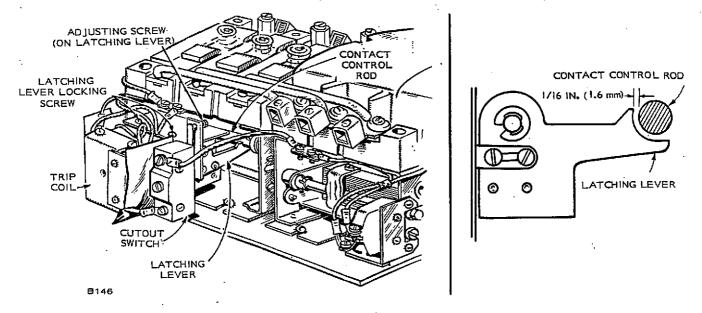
LATCH MECHANISM ON MECHANICALLY-HELD TRANSFER SWITCH
